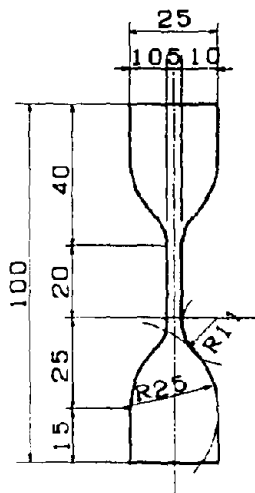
Dumbbell Type Test Piece (JIS K 6301)
